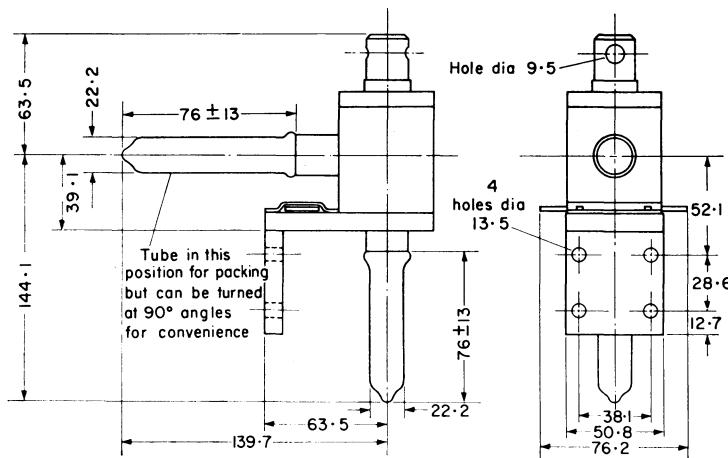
Dimensions of a Mullard ultra-high vacuum valve
